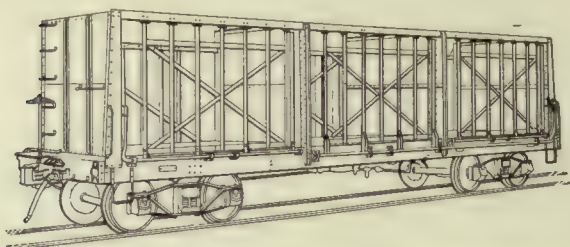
Side Discharge Cane Car, Hinged Stakes
